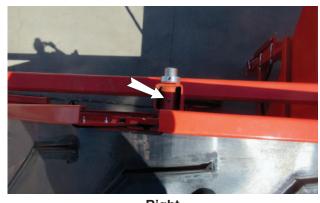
STEERING SPINDLE SHAFTS (TYPICAL)
